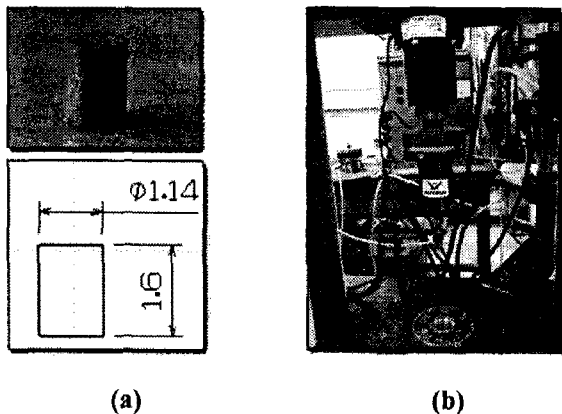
Compression test setup: (a) experiment specimen; (b) testing machine
